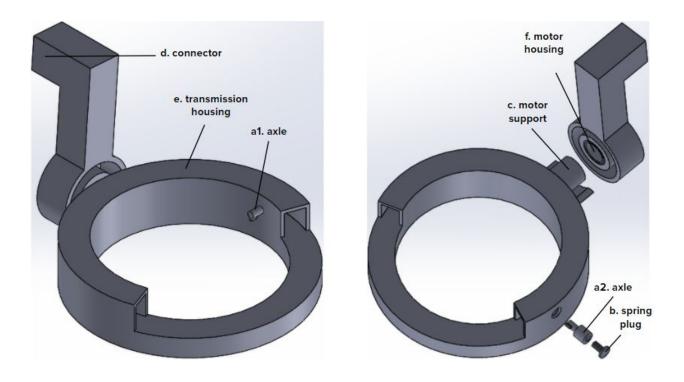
Mechanical Design CAD. *The retractor will be inserted into the ring, with which its circular cross-section will be concentric.
